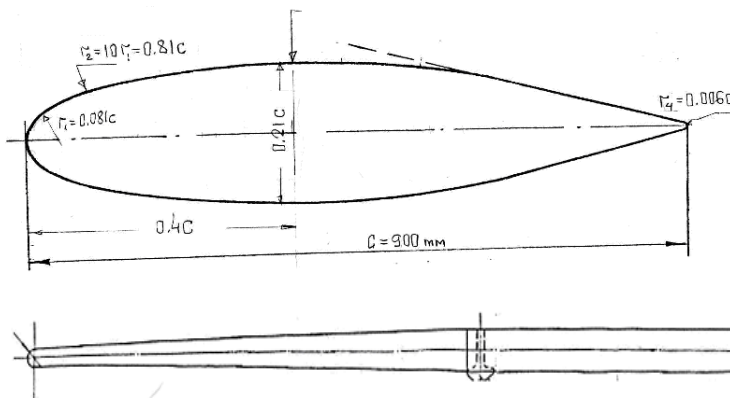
Blade for head samples of large wind turbines tested in a large TsAGI pipe: profile NASA0021
